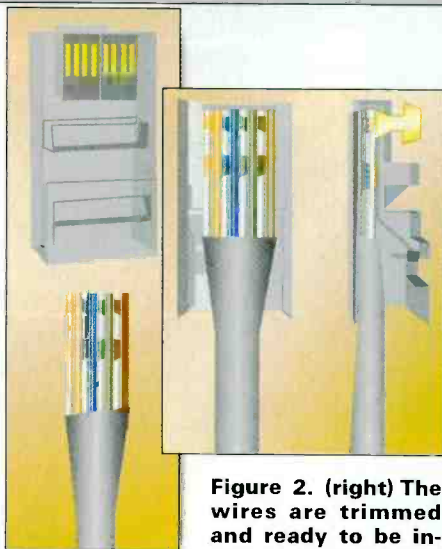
(right) The wires are trimmed and ready to be inserted in the RJ45
